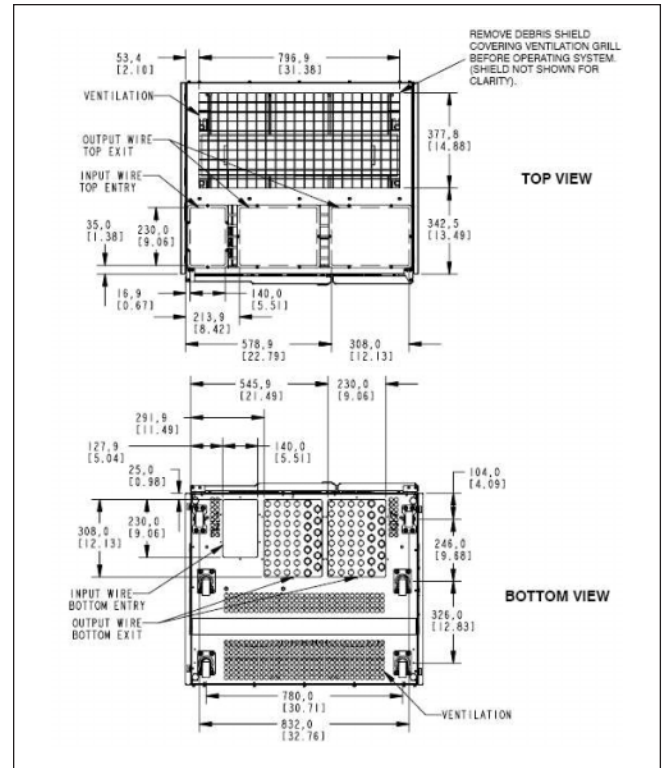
9390 (40-80 kVA) IDC Top and Bottom View
